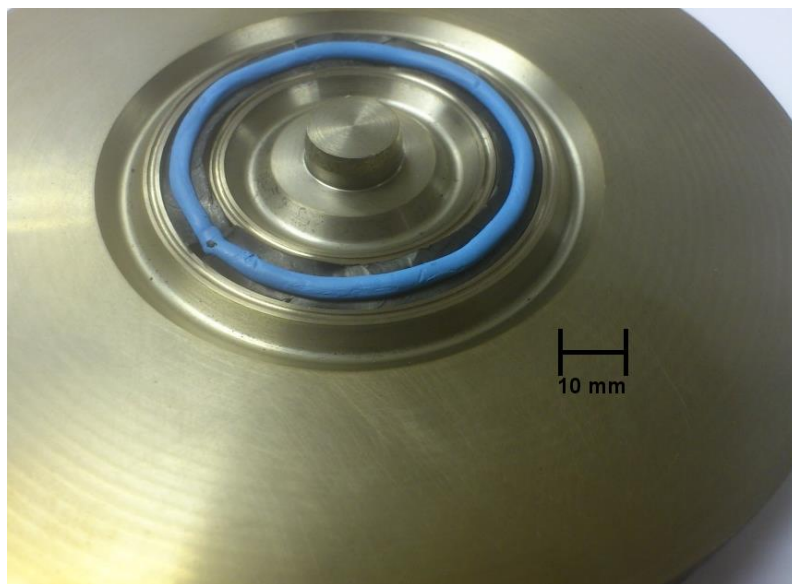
Bottom half of a hybrid O-ring with a circular insert in the centre contained in a compression mould before being cured for 6 minutes at 180 °C.
